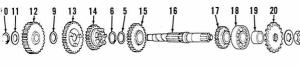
Exploded view of four speed transmission gears and shafts used in the YL-1.
